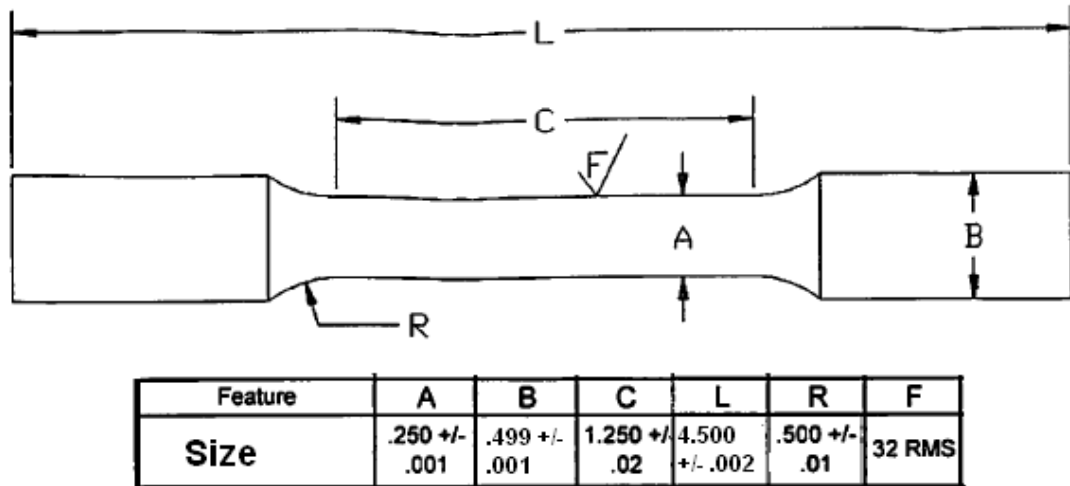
Round Bar Tensile Specimen with Dimensions
